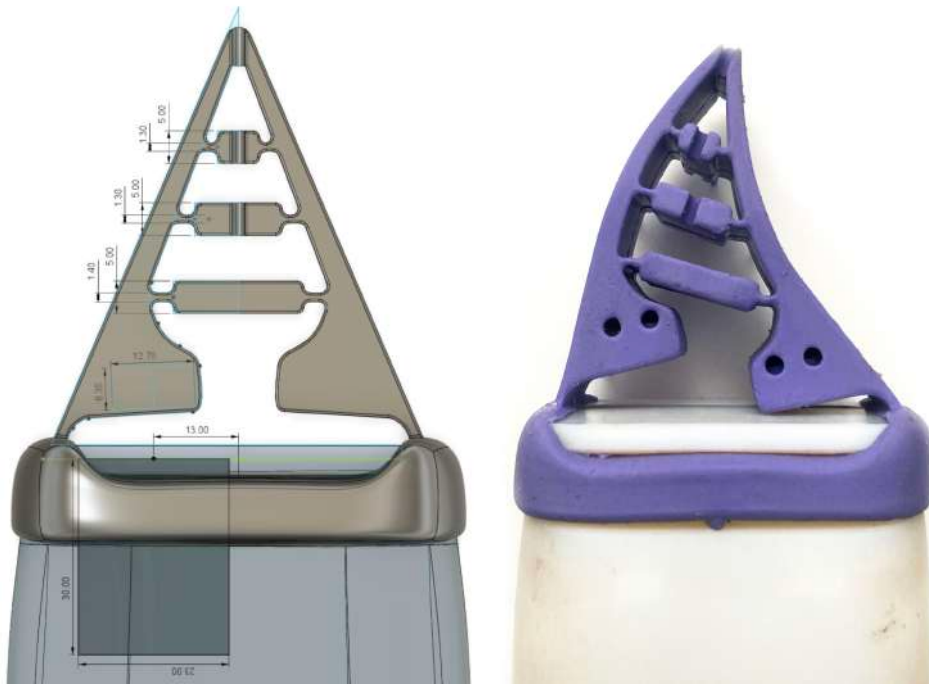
The top view of the CAD tail model and real world fabricated tail. Dimensions in mm.
